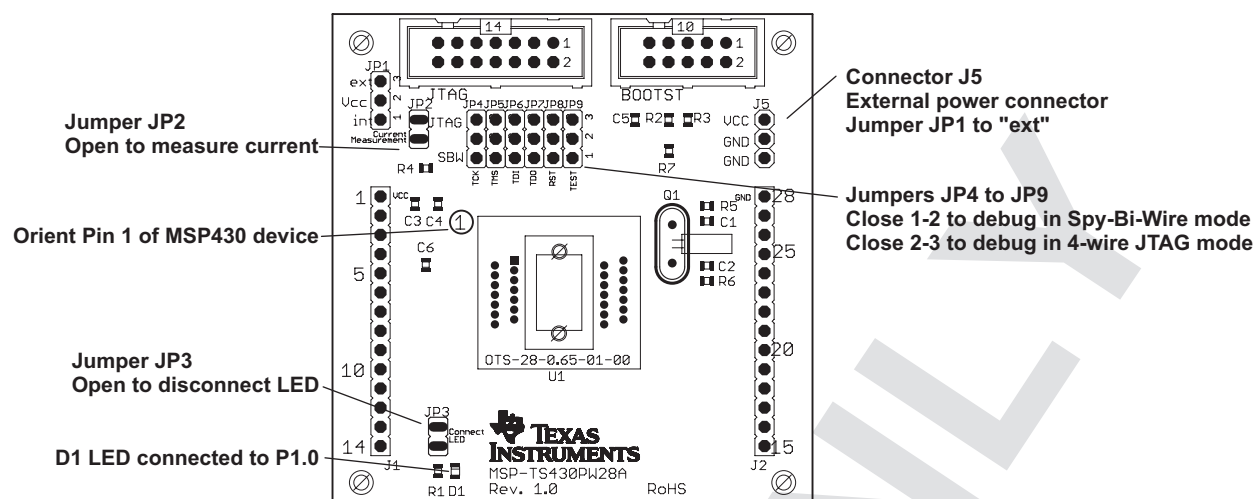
MSP-TS430PW28A Target Socket Module, PCB (Red)
